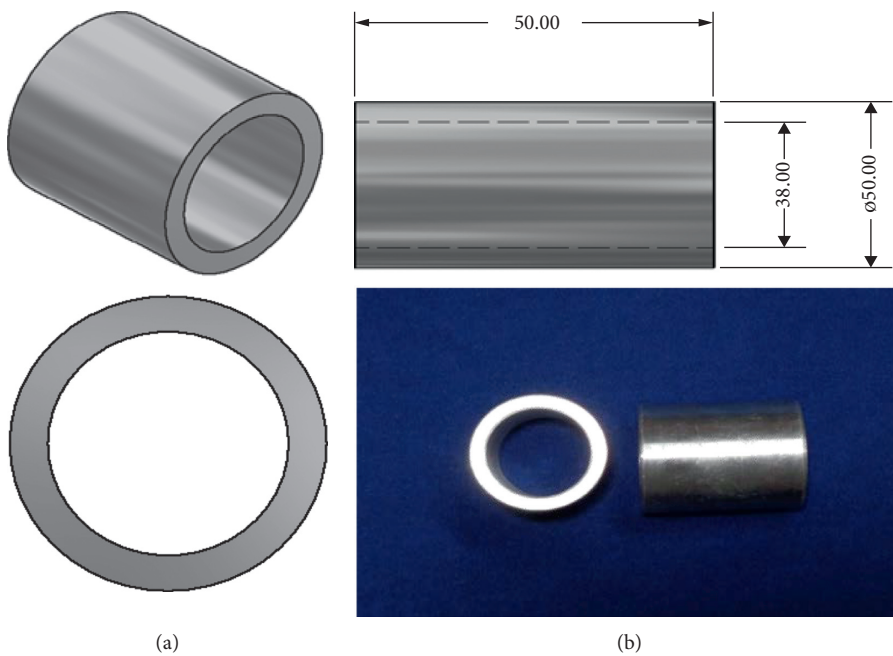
(a) Workpiece draft. (b) FSW (workpiece) component.
